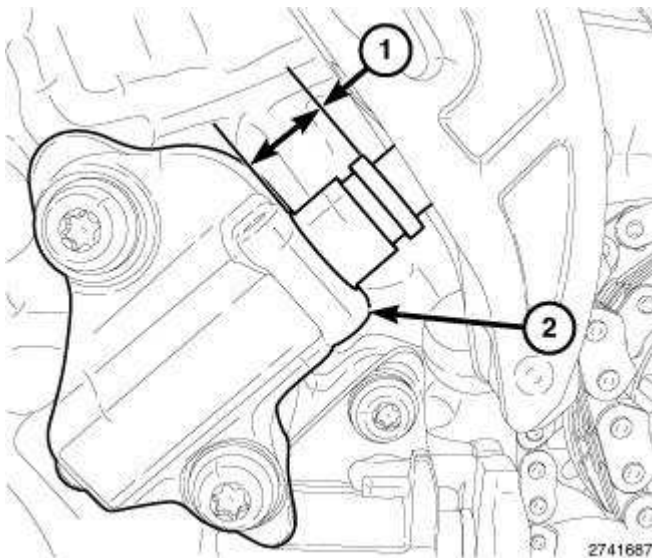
Piston Extension & Right Hand Cam Chain Tensioner
